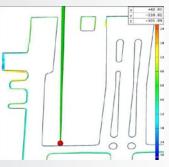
ATOS Inspection Software: Online View of Probing against CAD
